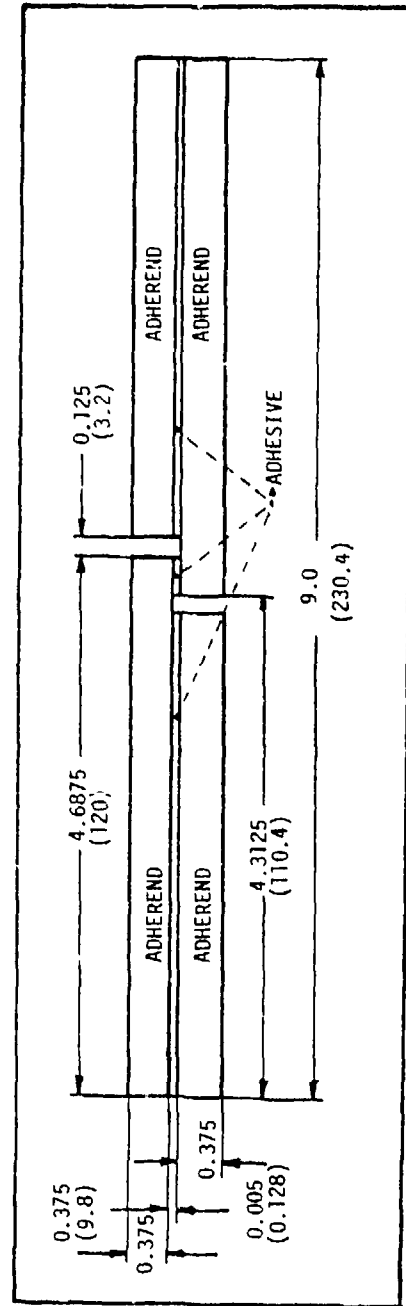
Geometry of the Thick-Adherend Specimen, Dimension in Inches, (Dimension in millimeters).
